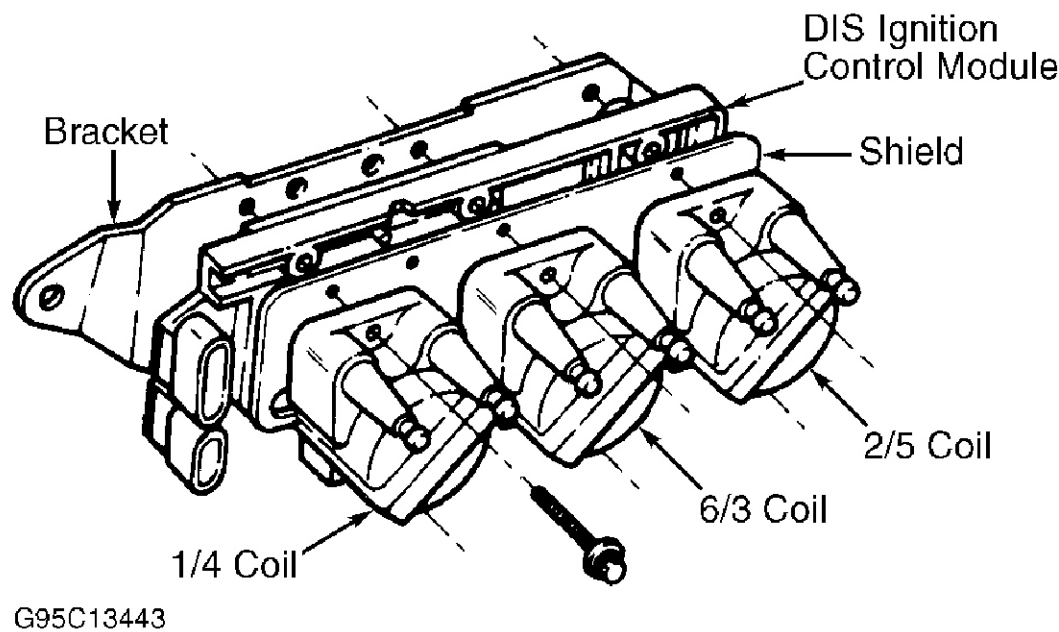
Locating Distributorless Ignition Control Module Components (3.1L & 3.4L)
